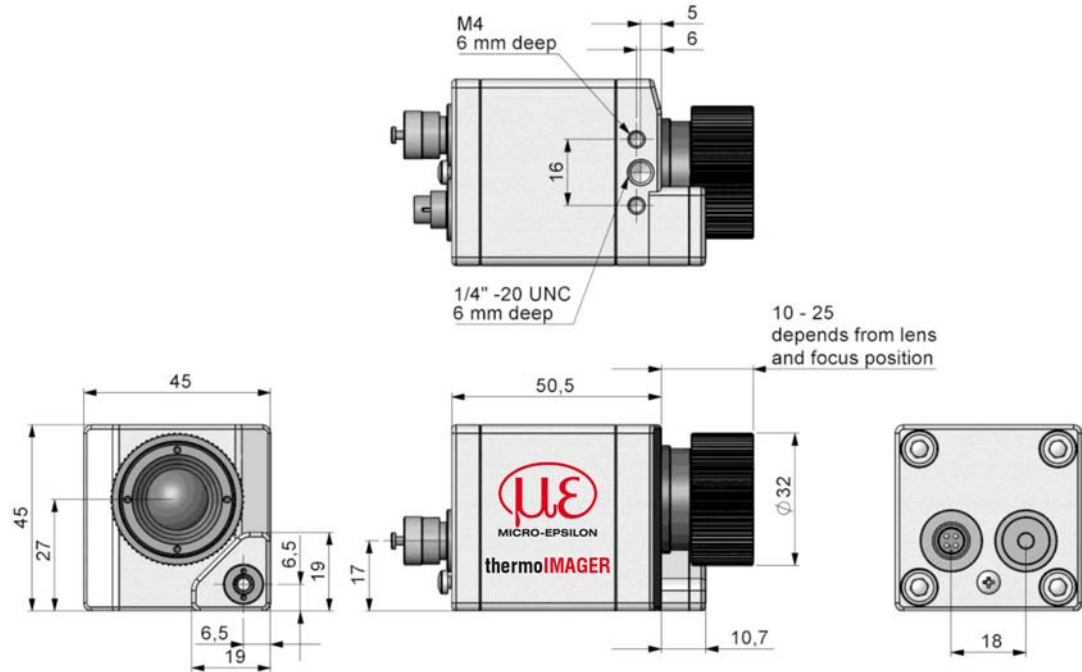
Dimensional drawing TIM 200 / 230, dimensions in mm, not to scale
